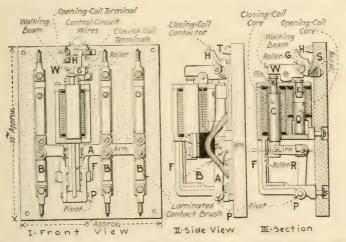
Three-pole, mechanically-held-closed, remote-controlled switch. (Sundh Electric Co., Bul. 7200.)
